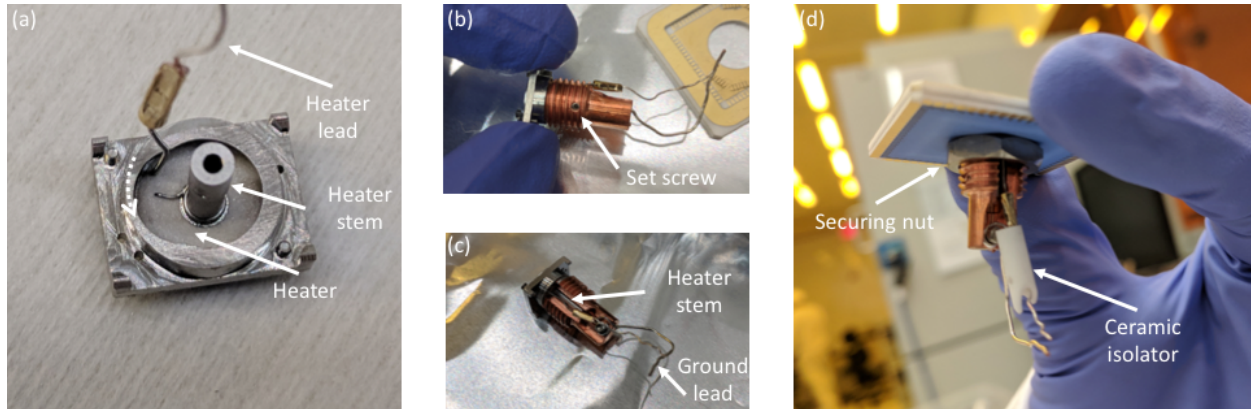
Several different views of the heater assembly (a) The hole in the stainless steel holder for the heater is asymmetric, so it is necessary to rotate the heater until the heater lead is in the augmented part of the hole before attaching the copper heat sink. This ensures electrical isolation between the heater lead and the stainless steel holder. (b) A set screw on either side is screwed into the heat sink until it makes contact with the heater stem, which secures the heater to the heat sink. (c) The heater stem serves as the ground connection via the set screws and the ground lead attached to the copper heat sink. (d) The securing nut is screwed onto the copper heat sink, creating pressure between the stainless steel holder on top of the CLCC and the nut, which secures the assembly to the CLCC. The ceramic isolator is pushed into the copper heat sink and ensures electrical isolation of the heater lead.
